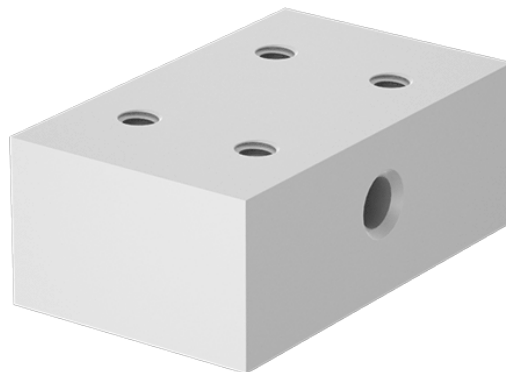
| Sleeve bearing made from a single piece of UHMW plastic. (www.mcmaster.com)
